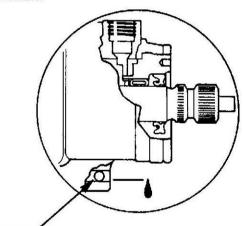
Revised Steering Gear Leak Diagnosis and Corrective Action (View A)
